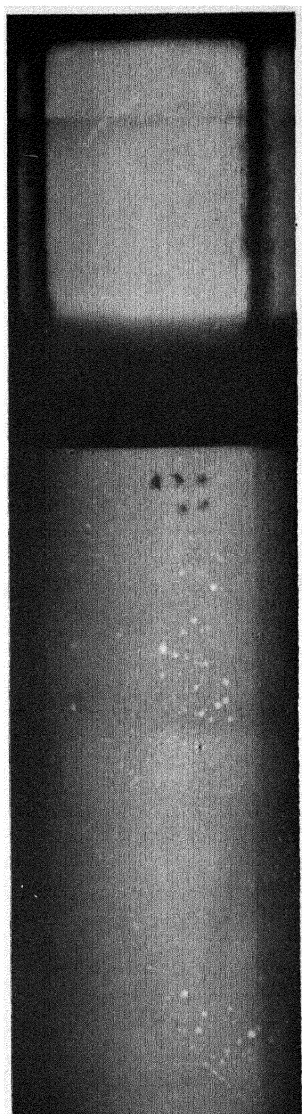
RADIOGRAPH OF A CYLINDRICAL CASTING IN
